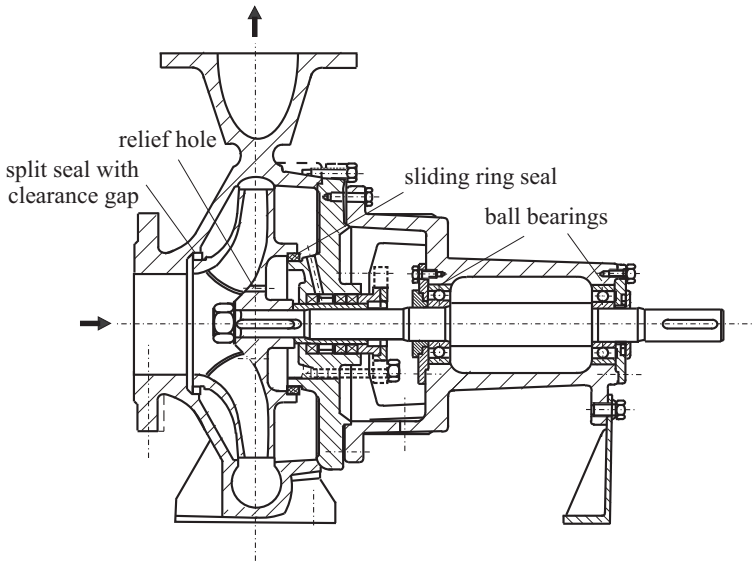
Sectional drawing of a typical centrifugal pump (KSB Etanorm)
